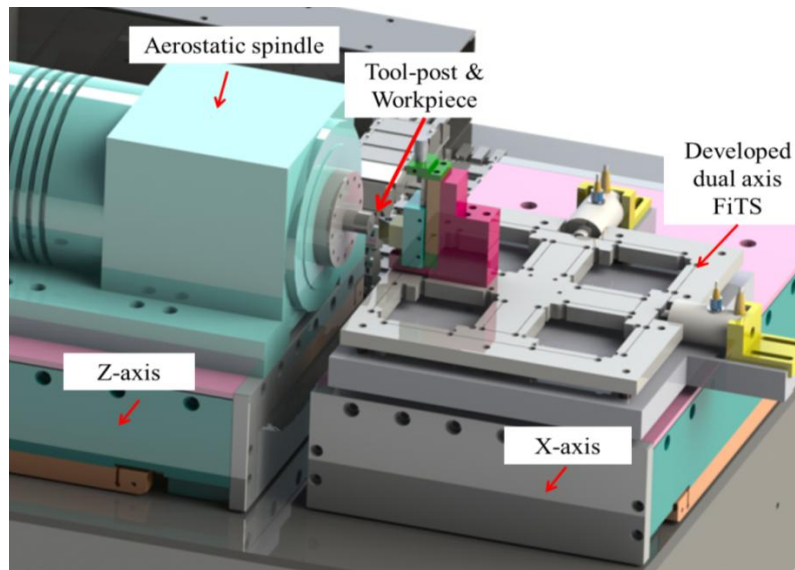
CAD model of dual axis FiTS system assembly in DTM
